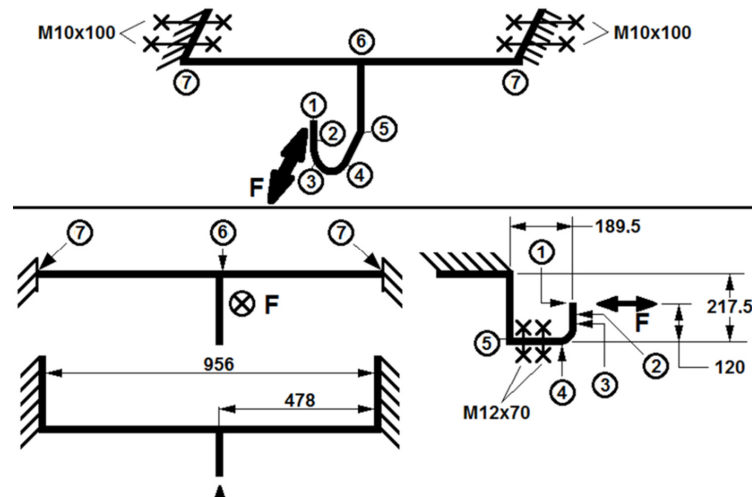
Simplified sketch of the studied towing system. Points 1, 2, ..., 7 are points of interest where the calculations will be made.
